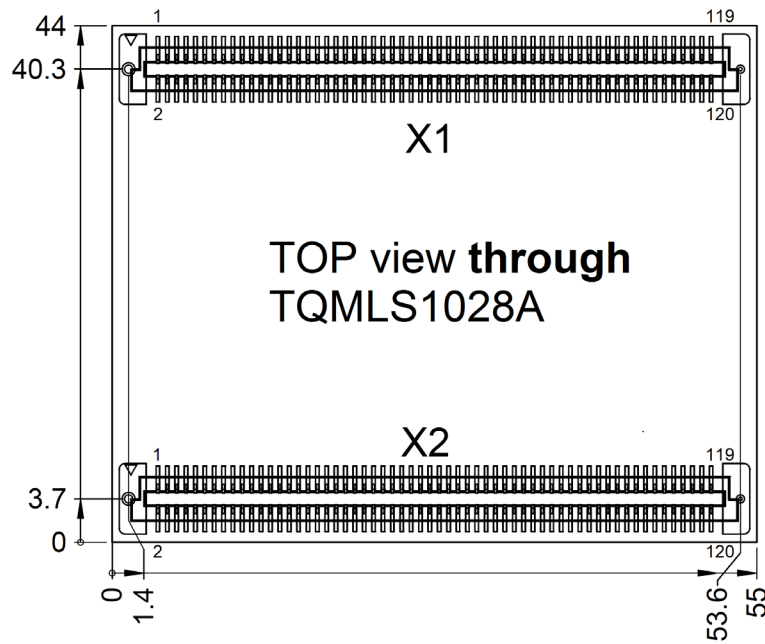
TQMLS1028A dimensions, top view through TQMLS1028A
